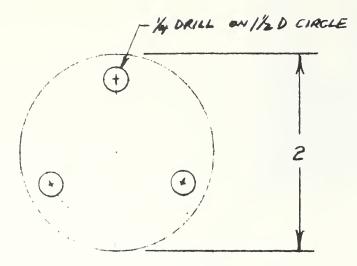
CHAIN TEST JIG ZISO442 ASSEMBLY 2 REQUIRED
